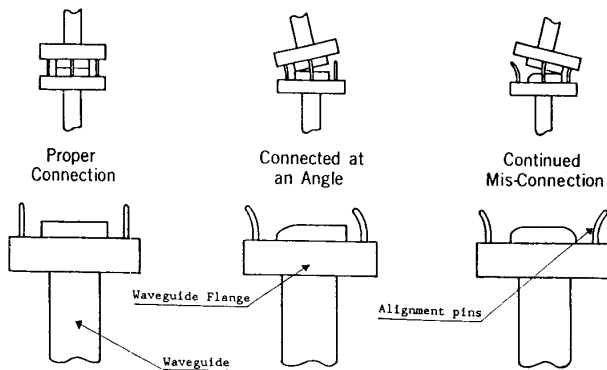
Waveguide flange contact area rounding caused by continued improper connection of the two flanges.
